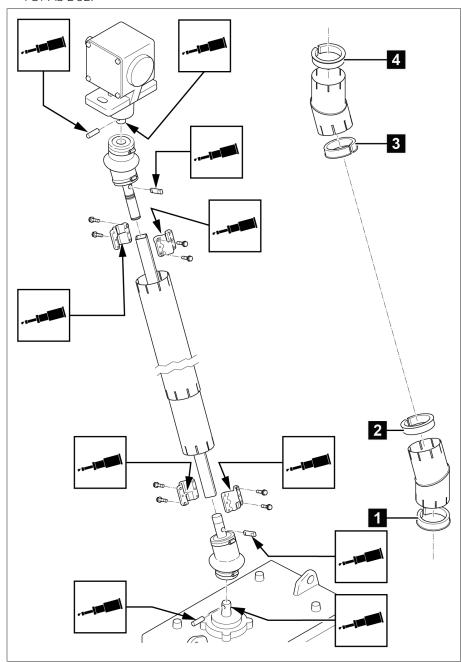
Greasing coupling bolts, coupling brackets, and shaft ends
